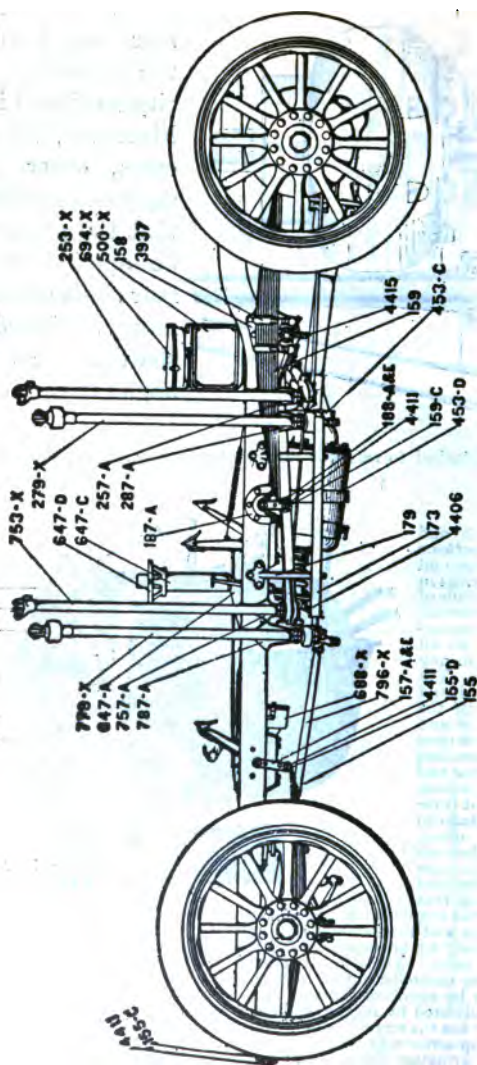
,050.—Side view of Baker electric chassis. The parts are: 155, front spring; 155-C, front spring bolt, front; 155-D, front spring bolt rear; 157-A, front spring shackle; 157-E, front spring shackle lock plate; 158, rear spring bracket center; 159, rear spring; 159-C, rear spring bolt; 173, step pad; 179, step bracket; 187-A, front hanger for rear spring; 188-A, rear spring shackle; 188-E, rear spring shackle lock plate; 253-X, rear control mast; 257-A, rear control mast bracket; 278-X, steering mast, rear; 287-A, steering mast bracket, rear; 453-C, safety loop, short; 453-D, safety loop, long; 500-X, controller; 647-A, seat pedestal bracket, left; 647-C, seat pedestal tube, left; 647-D, seat pedestal stop cup; 688-X, opening switch; 694-X, closing switch; 753-X, front control mast; 757-A, front control mast bracket, lower; 779-X, steering mast, front; 787-A, steering mast bracket, front; 796-X, lower steering rod, mast to bell crank; 3,937, rear spring clip. 4,406, 4,411, 4,416, grease cups.
